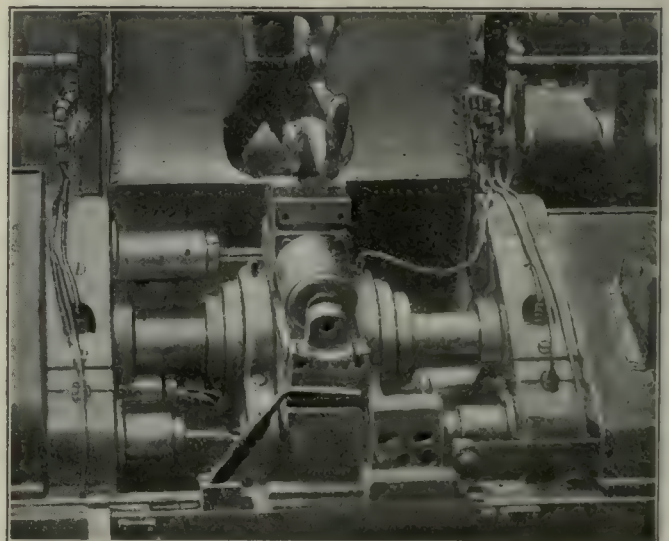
DOUBLE-HEAD MACHINE FOR PISTON-PIN HOLE
